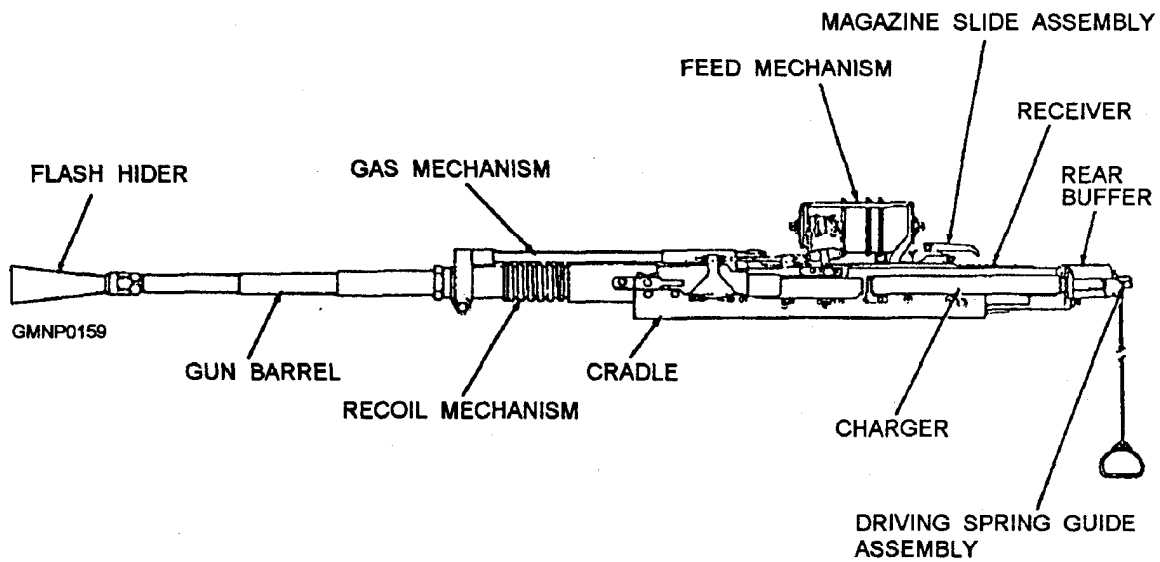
20-mm Mk 16 Mod 5 machine gun.
